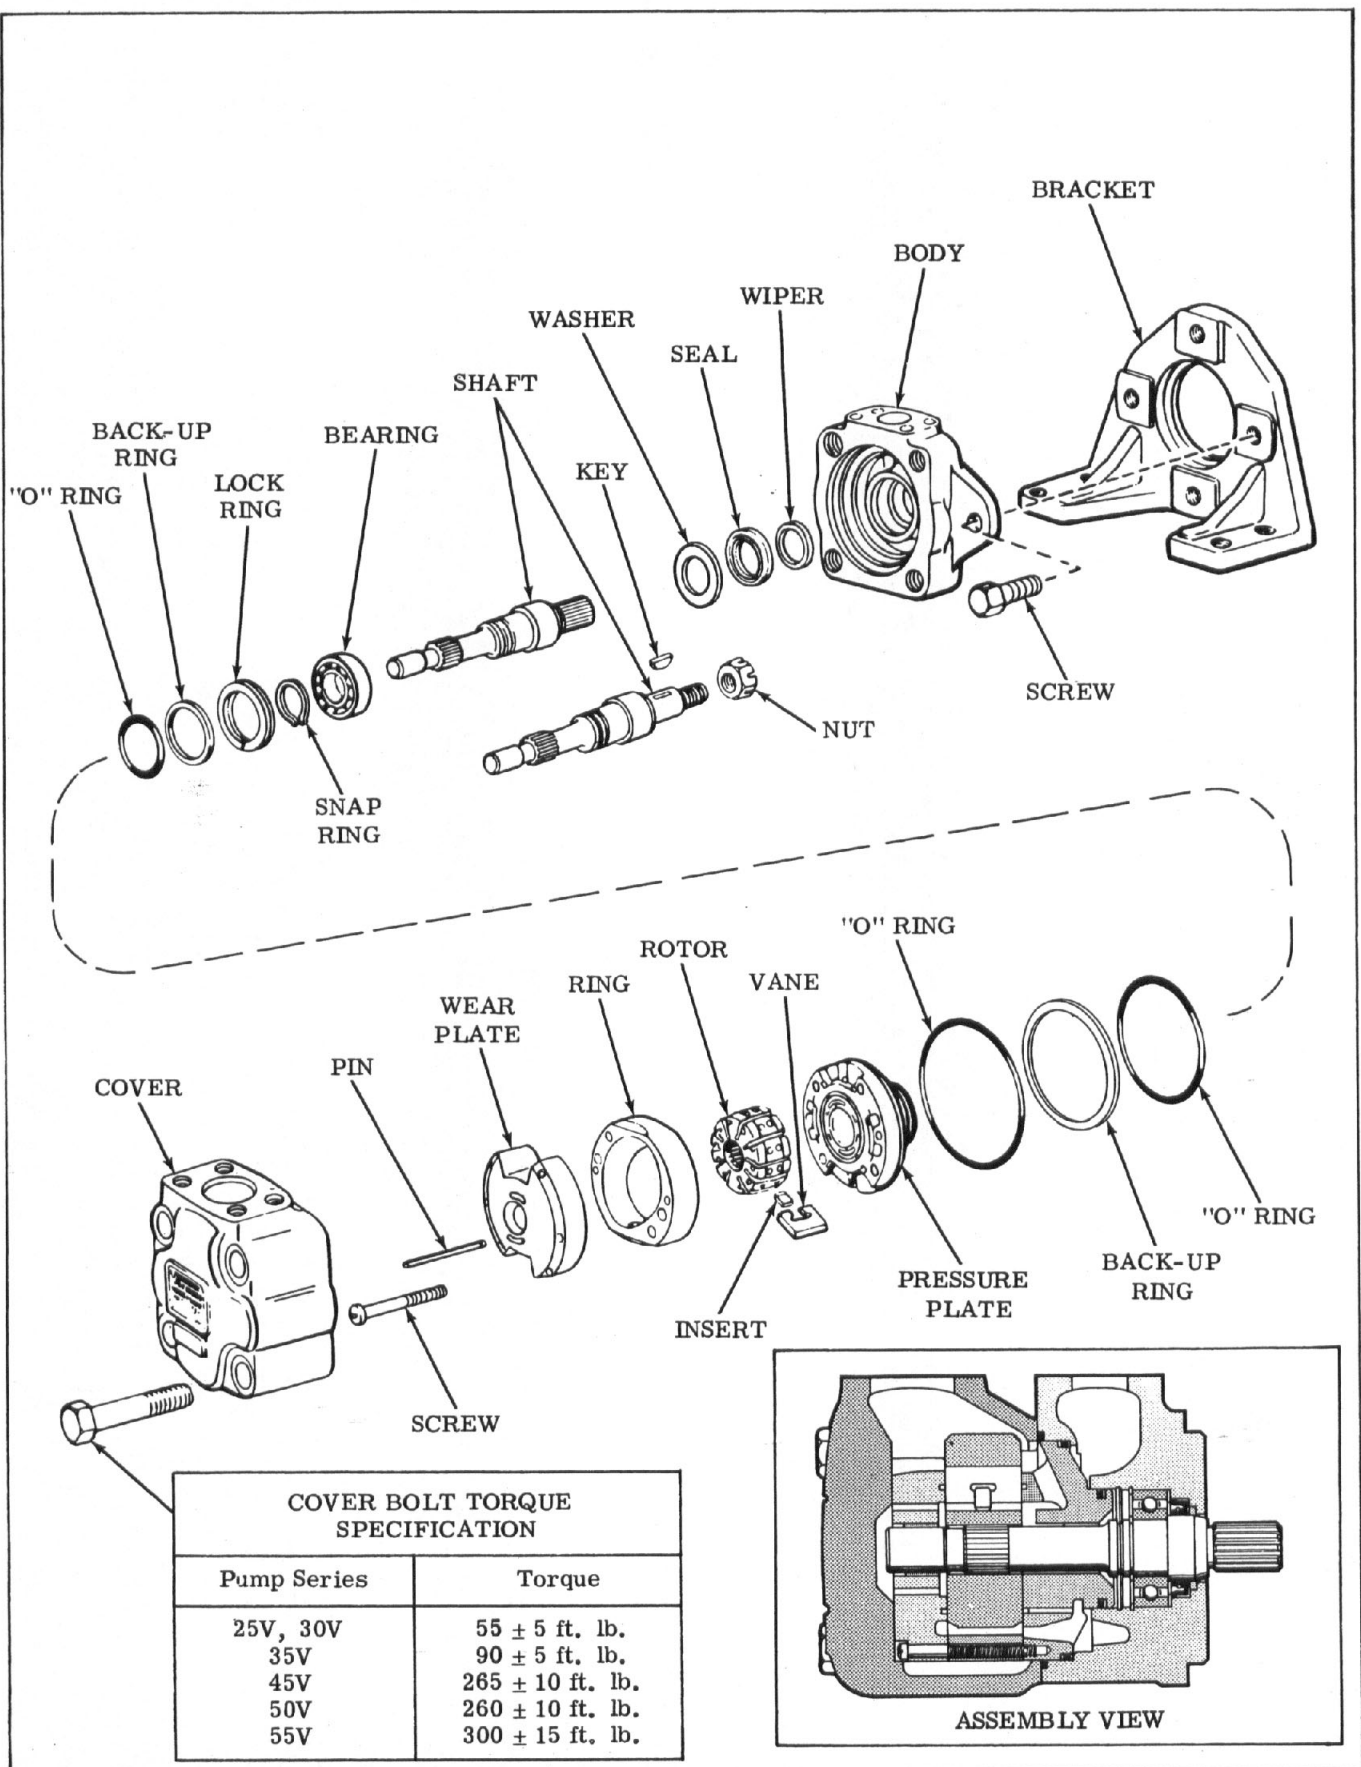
Exploded and Cross-Section Views of Typical Pump.
